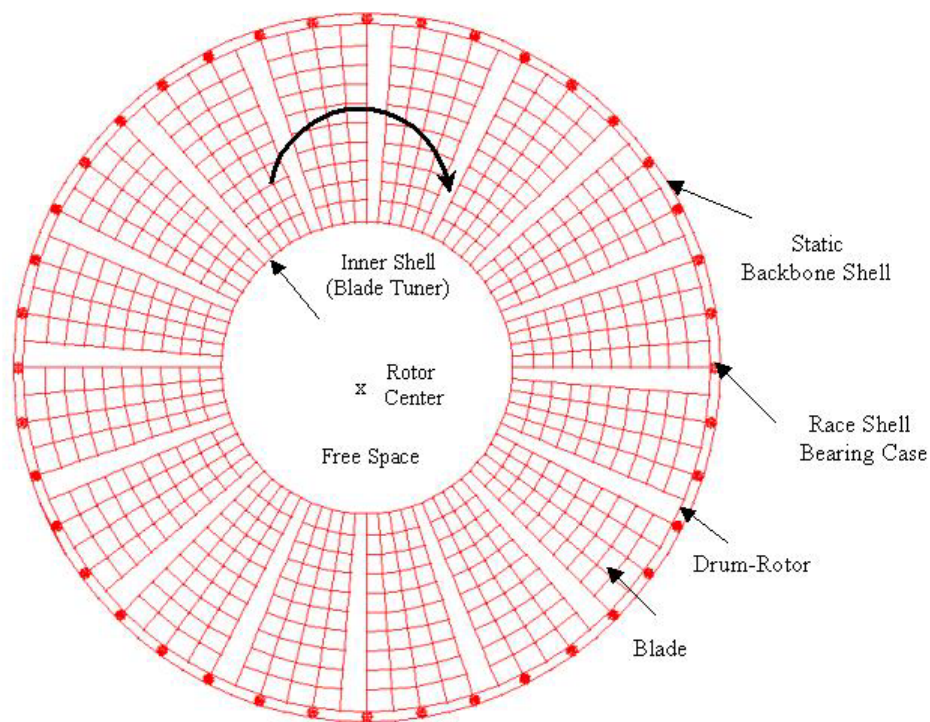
Projected View of a Typical Exo-Skeletal Engine Composite Fan Rotor.
